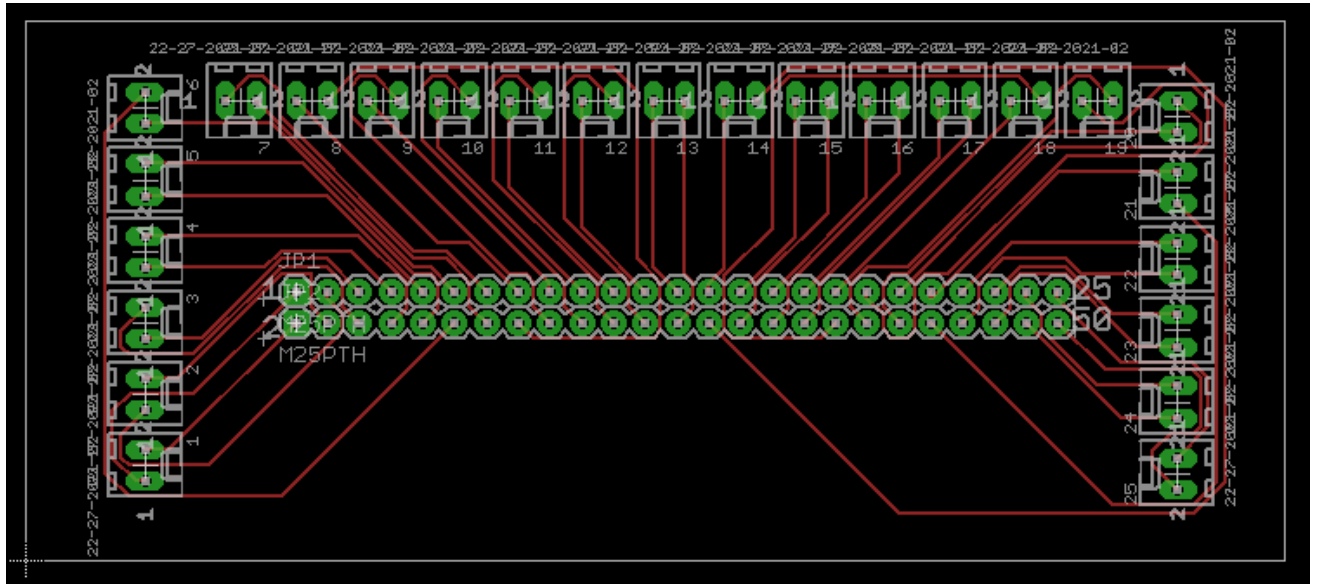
Schematic of the 50 pin Breakout Board for the Sensoray 826 I/O card
